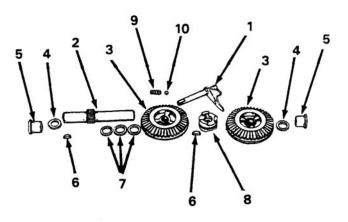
Drive Shaft and Shift Yoke Assembly
